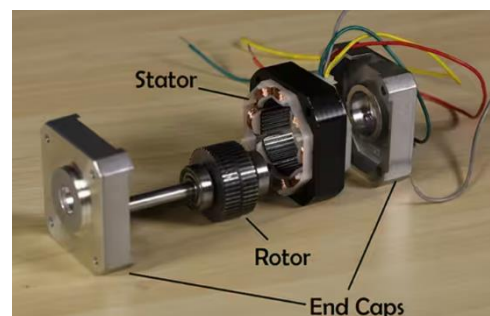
Stepper motor, composed by 2 parts: Stator and Rotor
